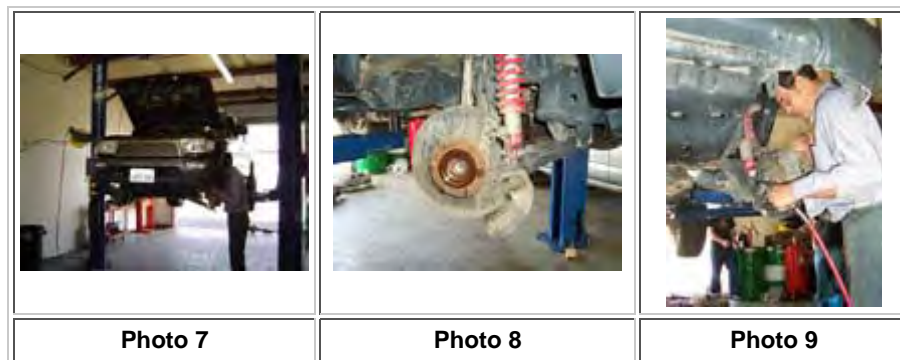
W59 5-Speed transmission and transfer case from a Tacoma with a 2.7 liter engine.Photo 4: Tacoma manual hub spindles before dis-assembly.Photo 5: Tacoma manual hub spindles before dis-assembly.Photo 6: All of the swap parts spread out to begin the work.Photo 7: Casey's truck goes up in the air and Vernon begins tearing it down.Photo 8: 2WD spindle.Photo 9: Vernon pulling the front apart.Photo 10: Spindle arms removed.Photo 11: 2WD spindles before being dis-assembled.Photo 12: Vernon beginning to remove the 2WD transmission.Photo 13: Pulling the 2WD Transmission.Photo 14: Non-ADD Tacoma diff ready to go in.
